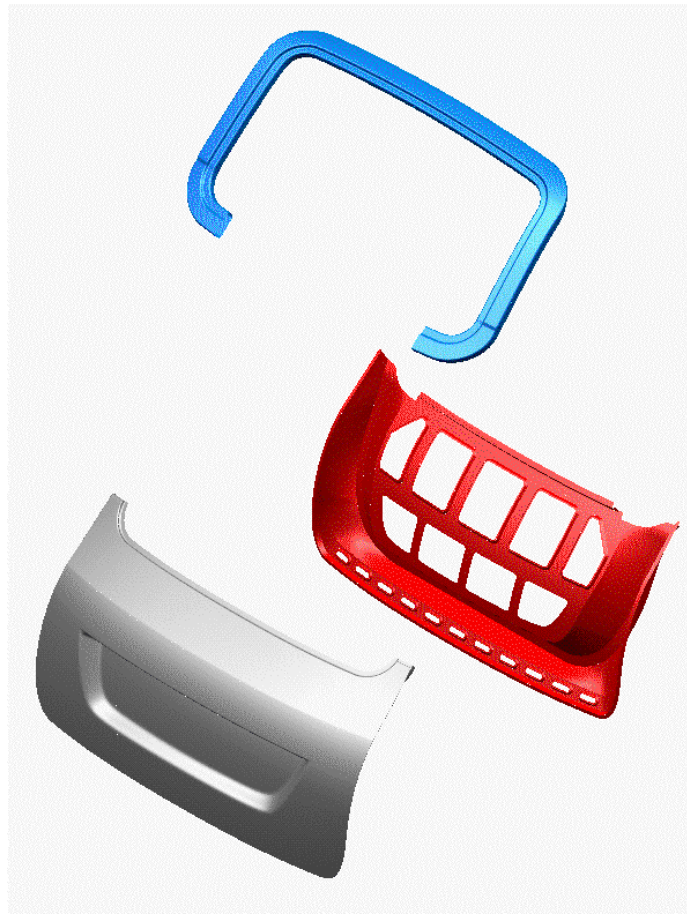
Exploded view of C-Class liftgate structure
